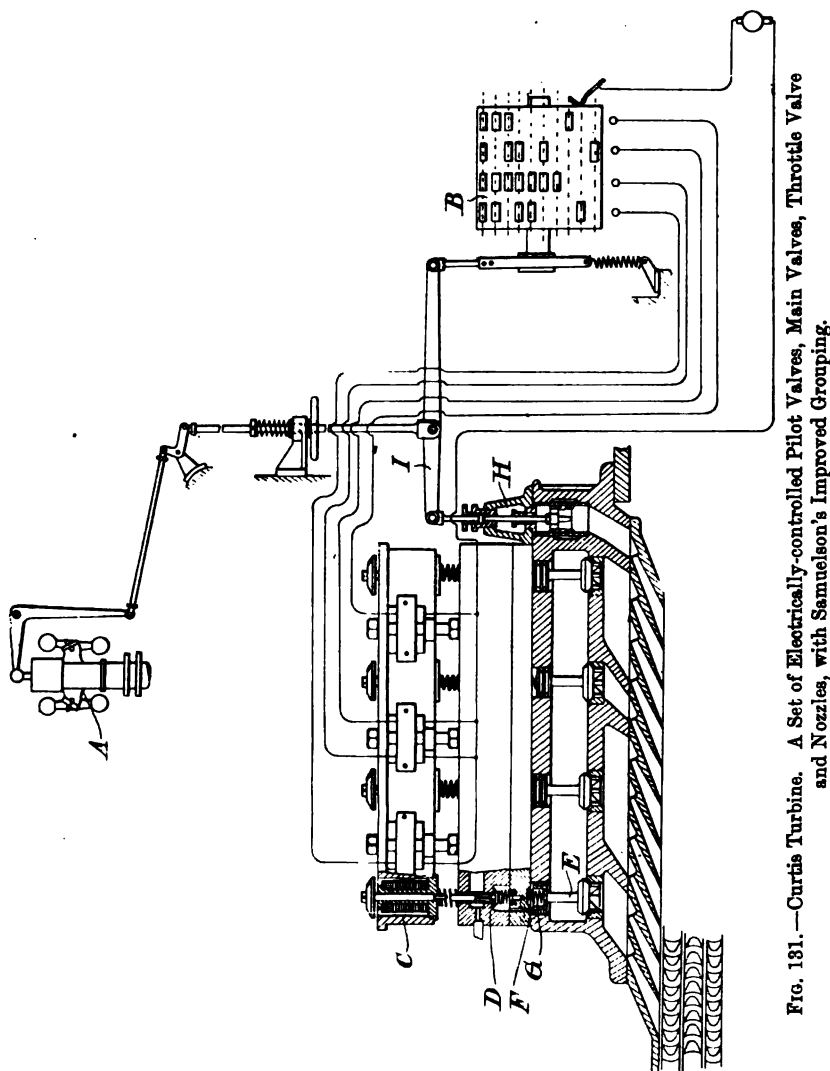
Curtis Turbine. A Set of Electrically-controlled Pilot Valves, Main Valves, Throttle Valve and Nozzles, with Samuelson's Improved Grouping.
